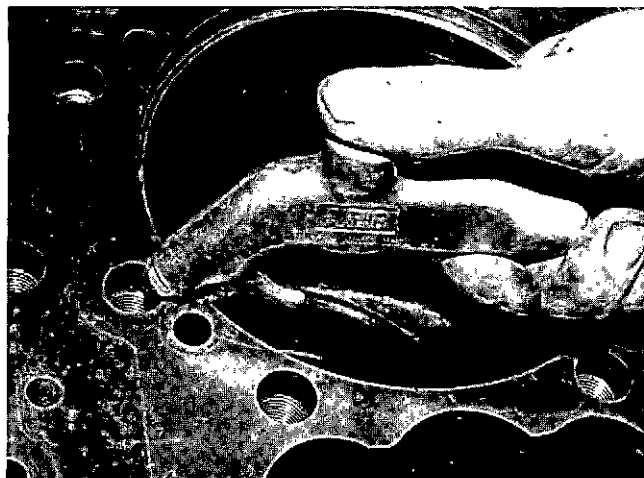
, V40121. Cleaning cylinder head capscrew hole
